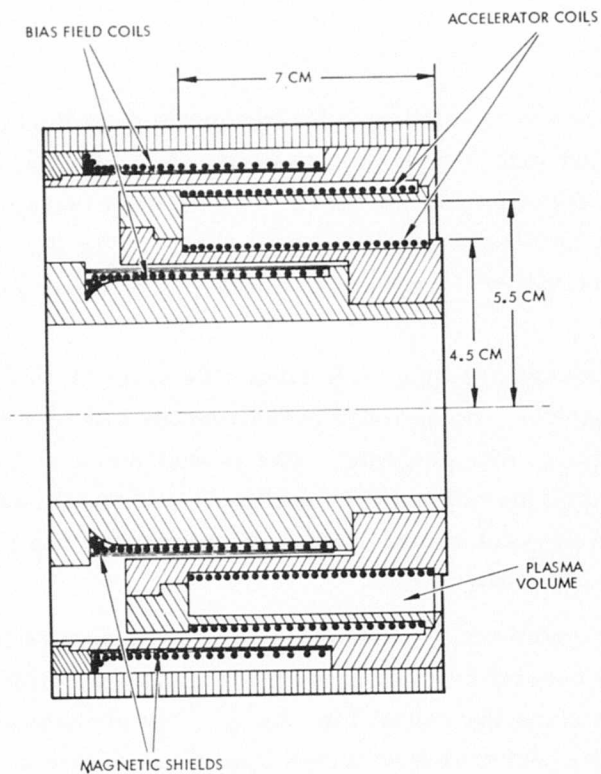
Cross-Sectional View of Axisymmetric Accelerator
